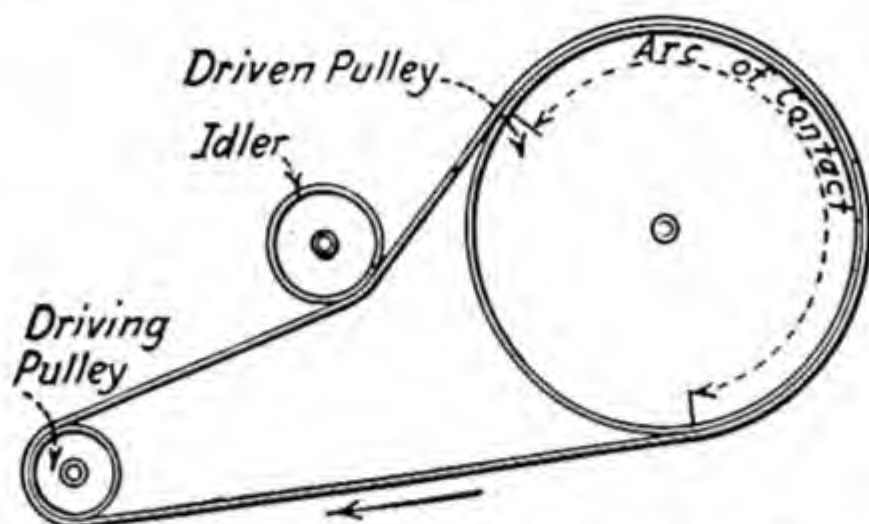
Method of placing idler on a belt; the tight side of the belt should be on the bottom.
